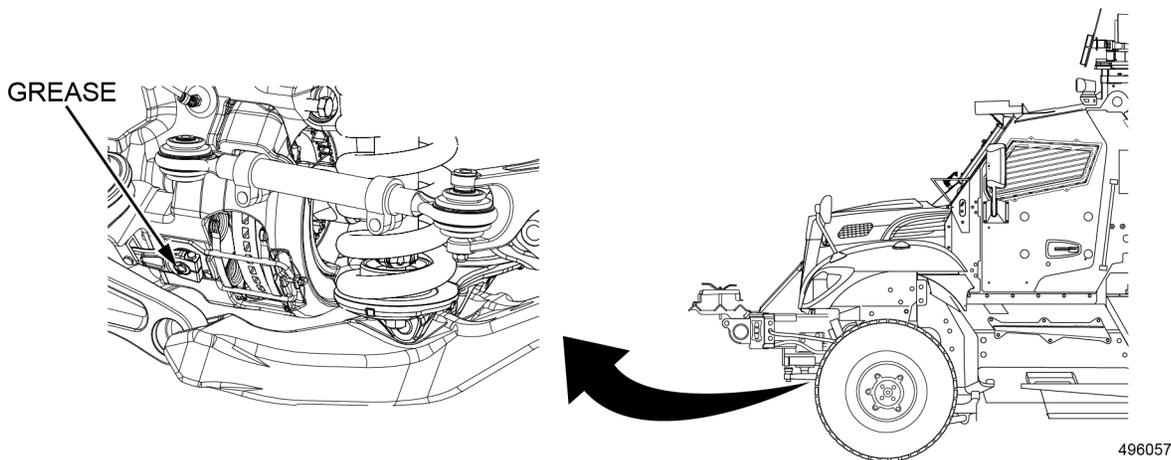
Driver Side Front Brake Caliper (Commander Side and Rear Brake Calipers Similar).
